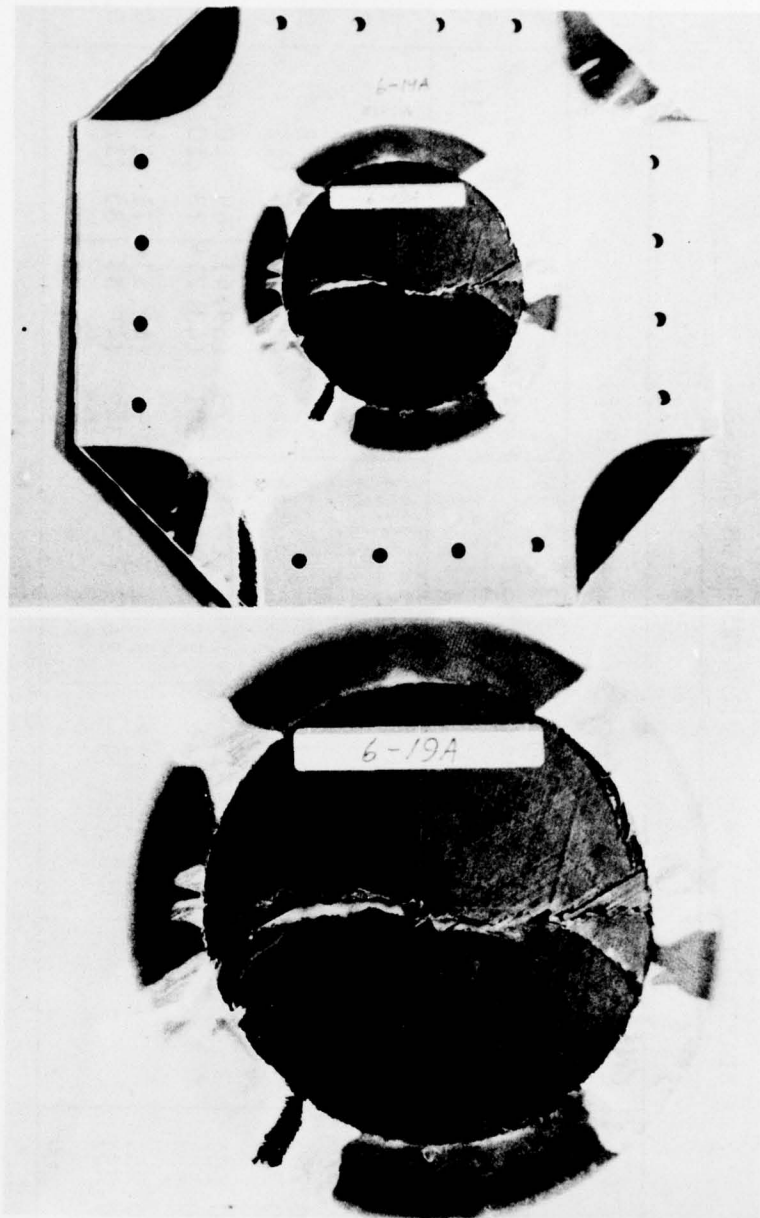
Biaxial Specimen with 0.64 cm (0.25 in.) Long Crack After Failure (Spec. No. 6-19A).
